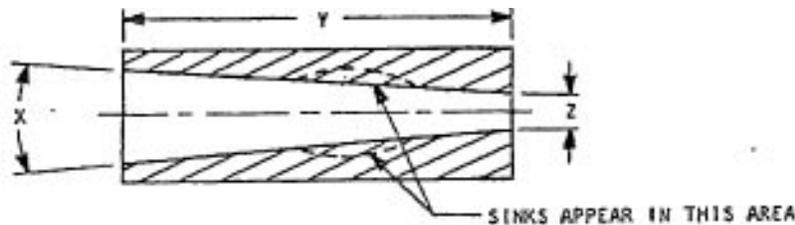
Concentricity tolerances for investment castings with holes.
